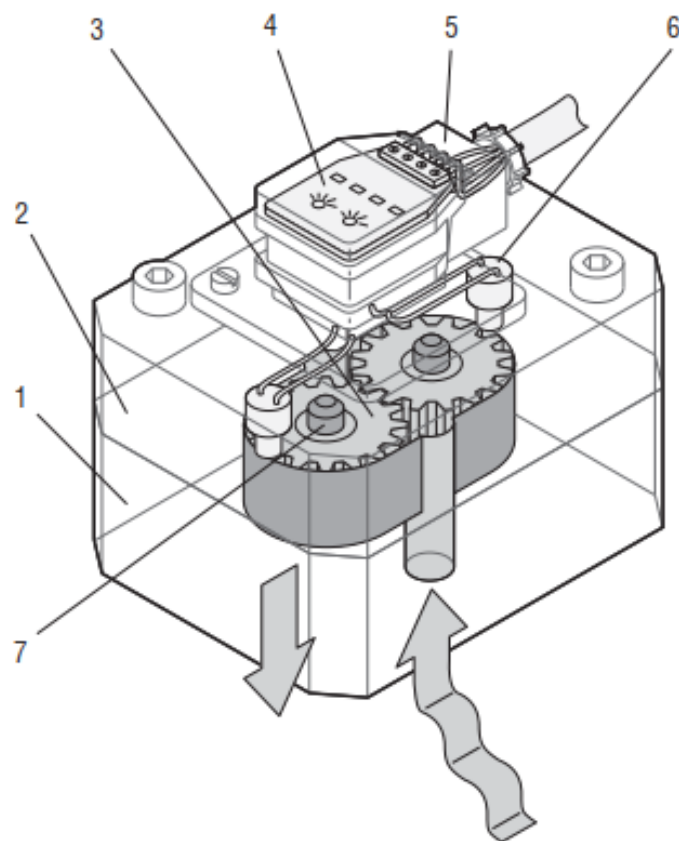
Kracht gear type flow meter. 1) Housing 2) Cover 3) Gear 4) Preamplifier 5) Connector 6) Sensor 7) Bearing assembly [28]
